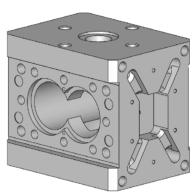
A fine part designed in 3D software, acting as an "input" for a CNC machine tool [authors' own work]
